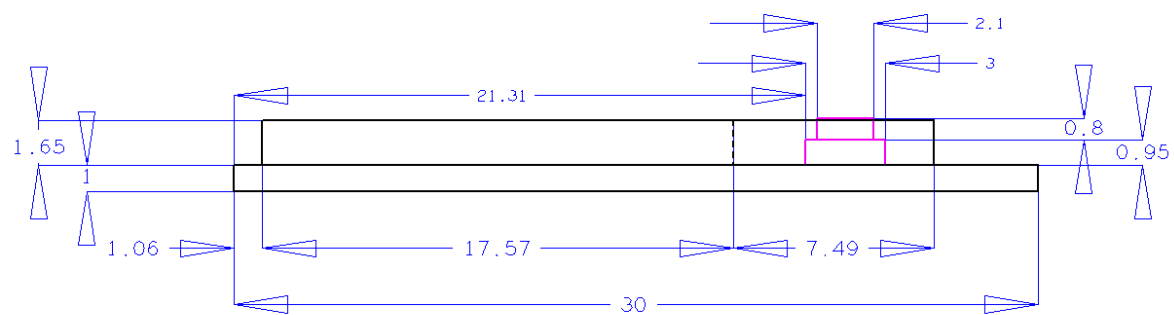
QFM-2202 module dimensions side view (unit: mm)
